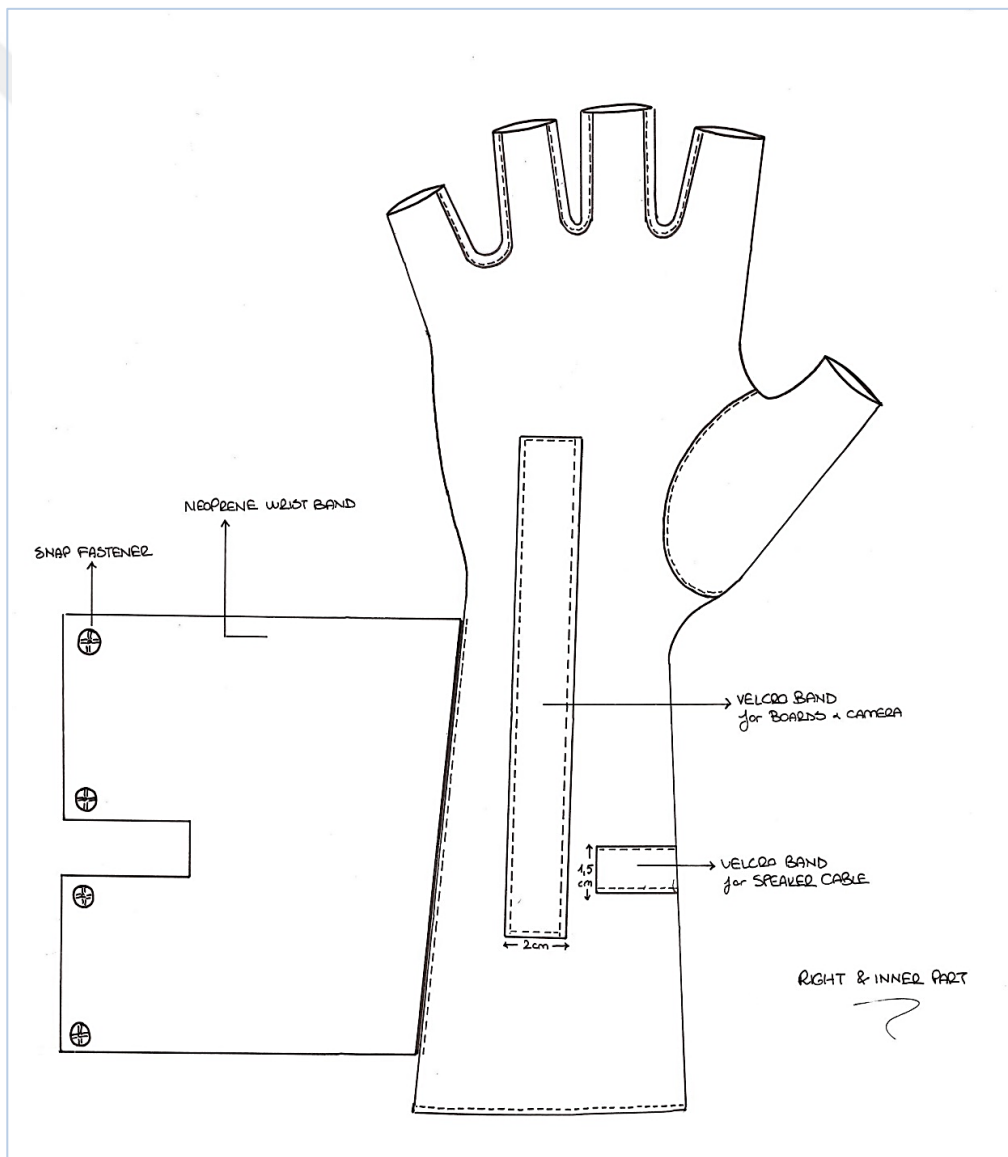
Technical Drawing of the Neoprene Glove Right & Inner Part
